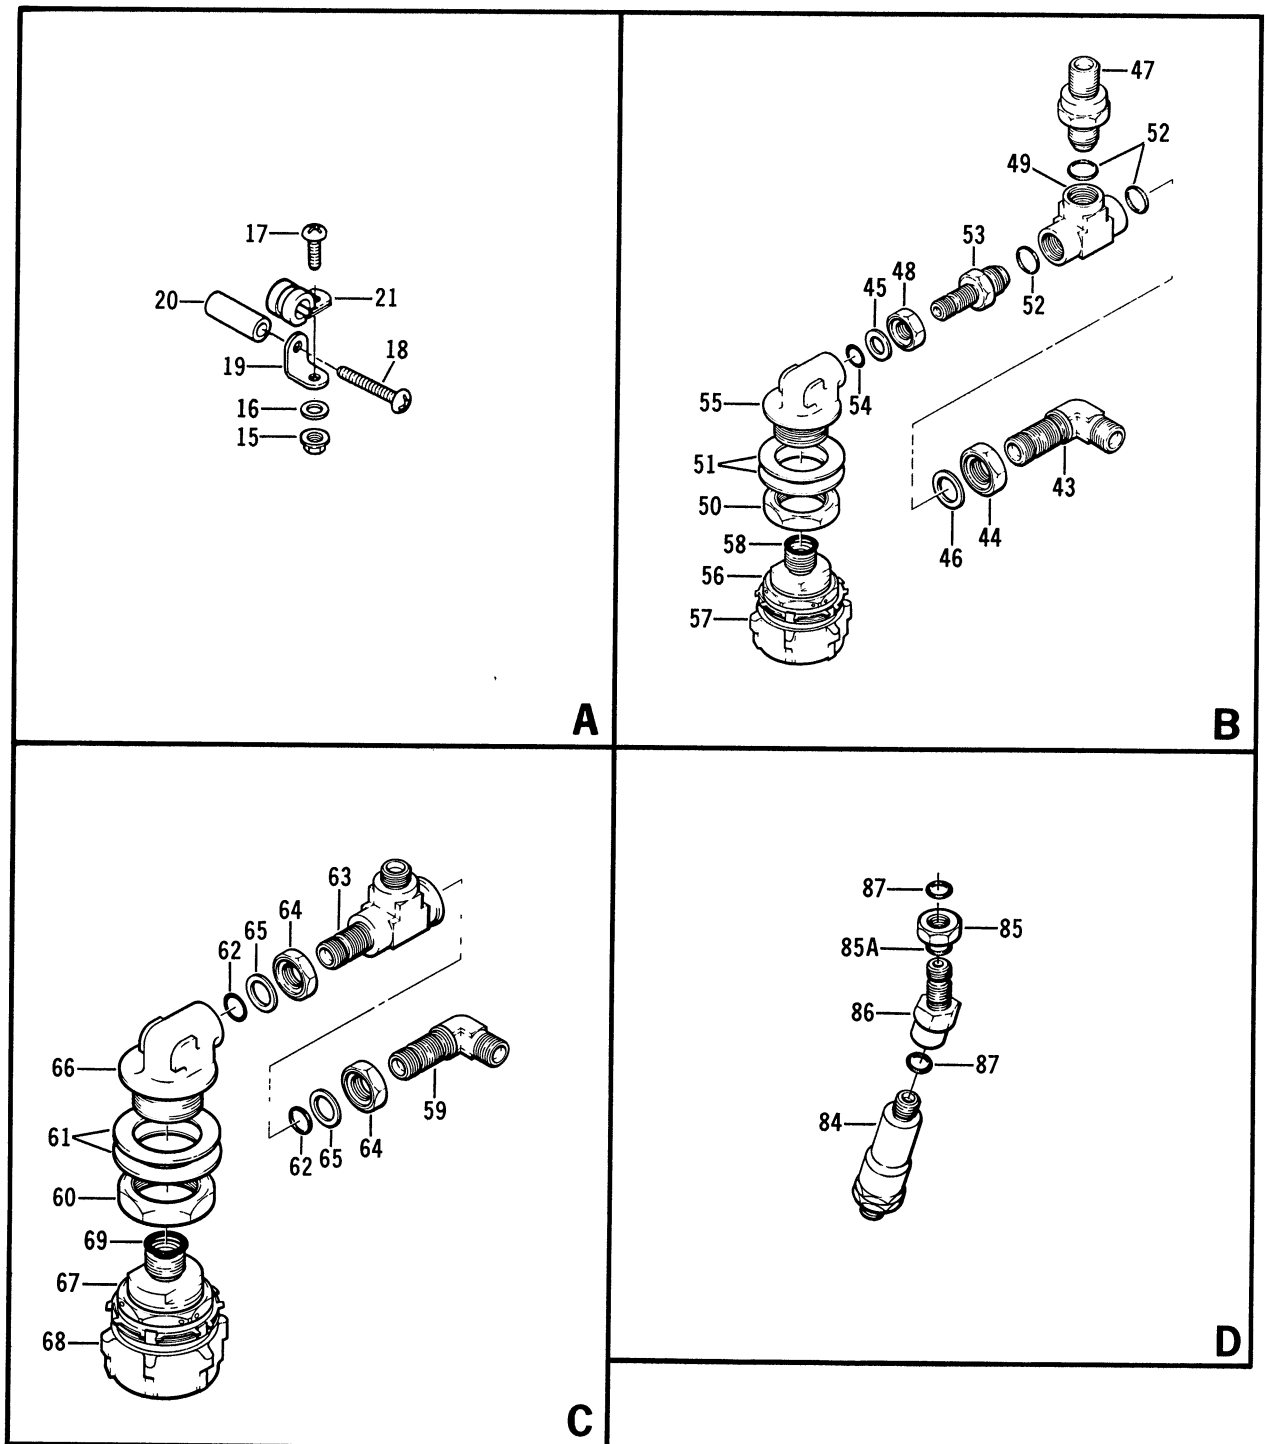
Hydraulic system 2 installation (Sheet 2)
